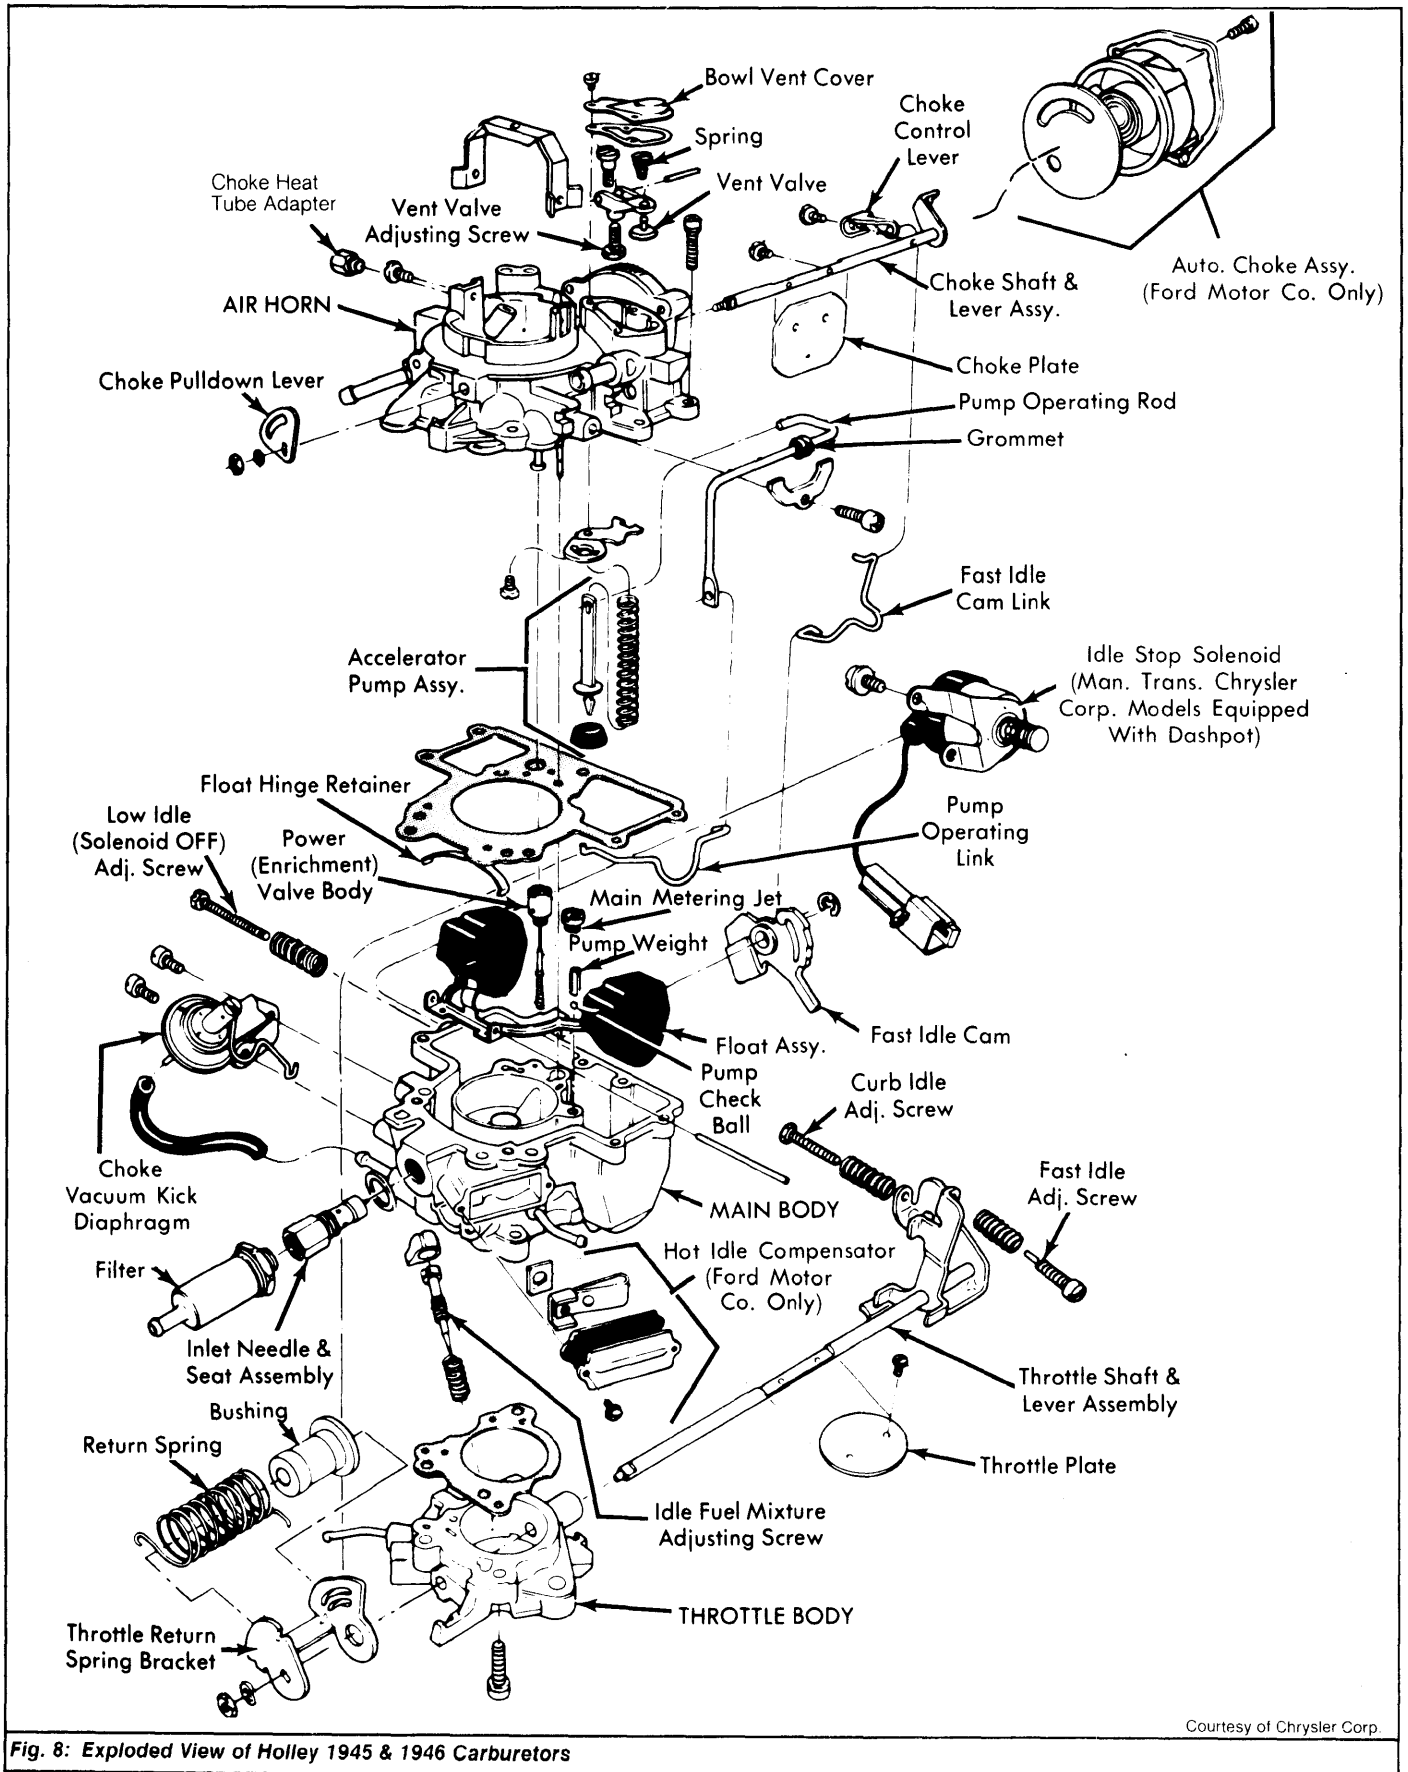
Exploded View of Holley 1945 & 1946 Carburetors
